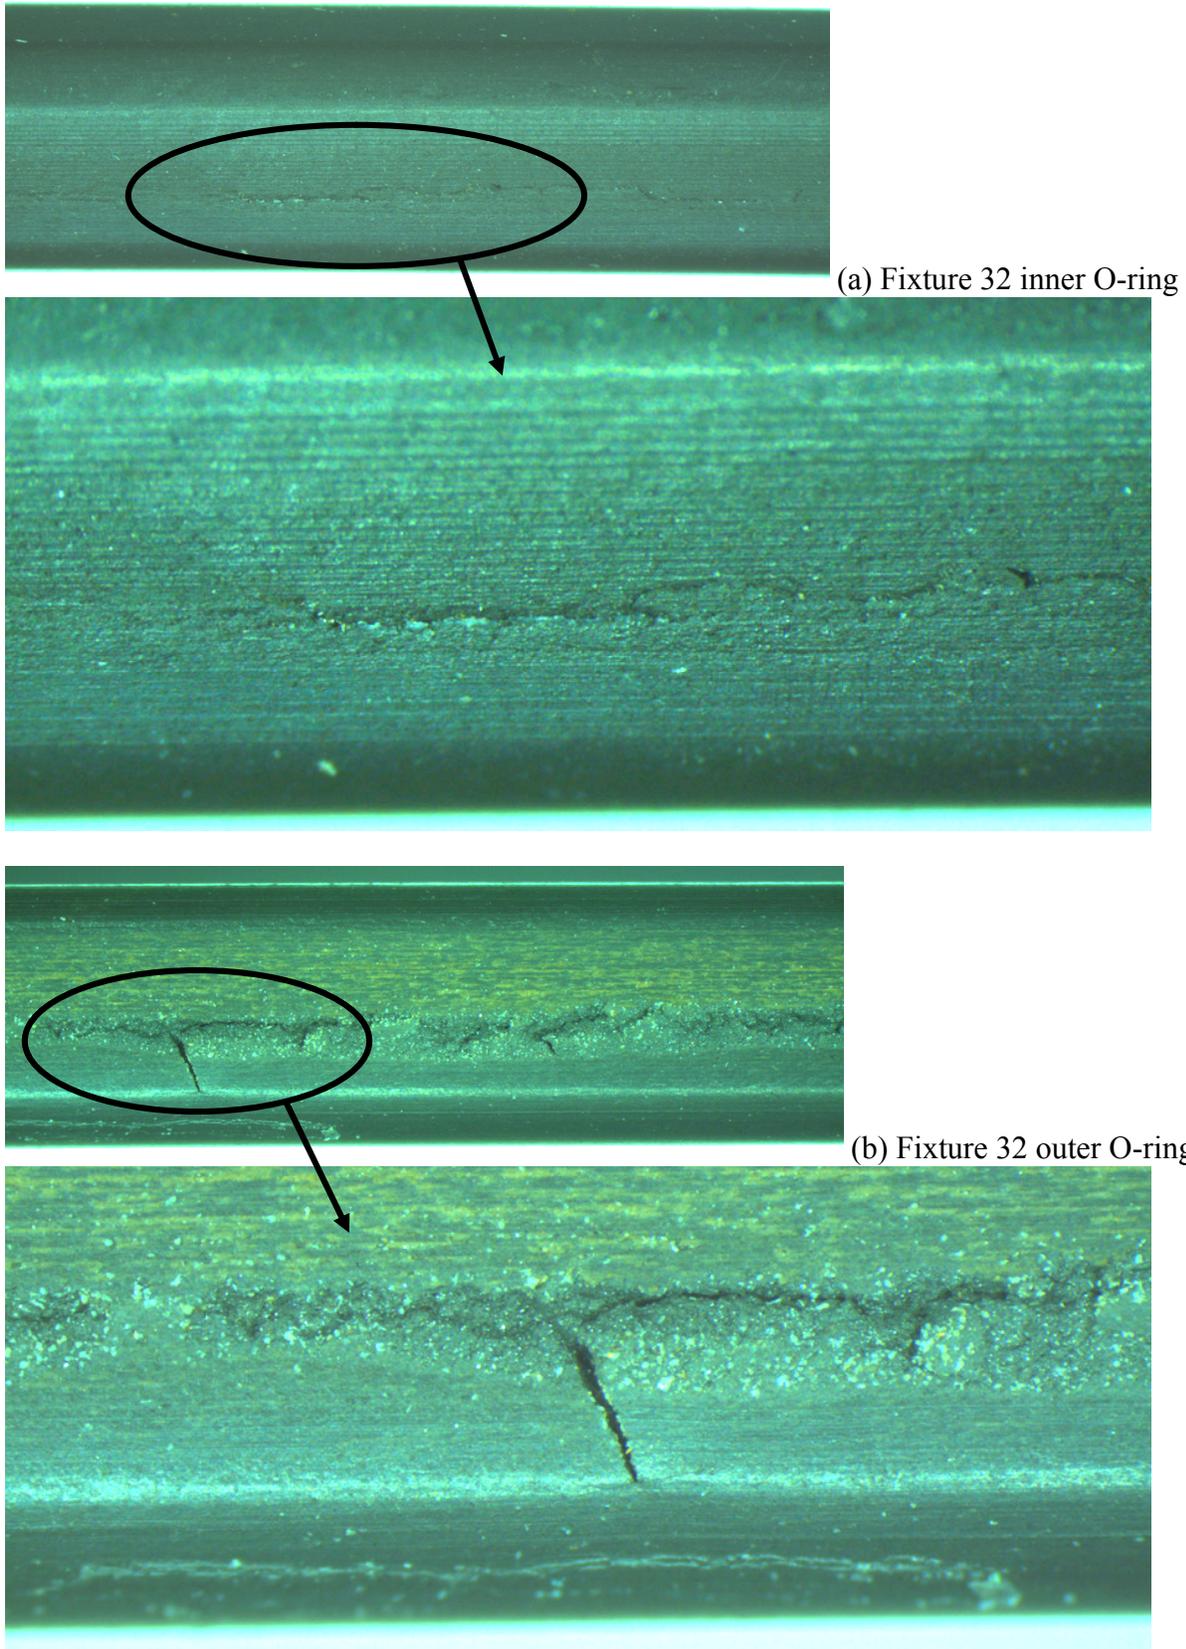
Fixture 32 O-ring ID surfaces showing material loss and/or cracking.
